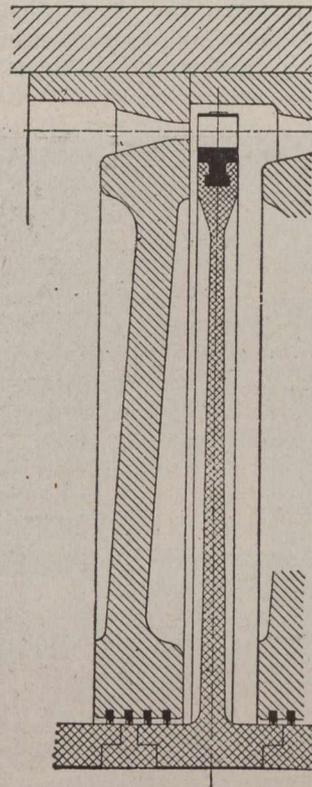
Runner and Guide Wheel of Zoelly Turbine.
